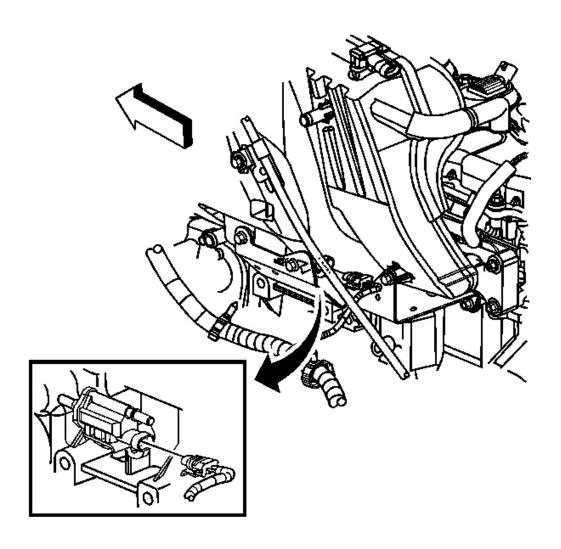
View Of EVAP Canister Purge Solenoid Valve Engine Wiring Harness
